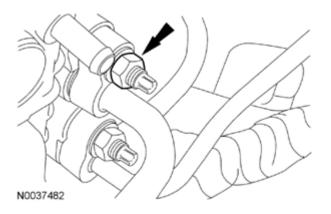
Locating A/C Condenser Tube Mounting Nut Courtesy of FORD MOTOR CO.
